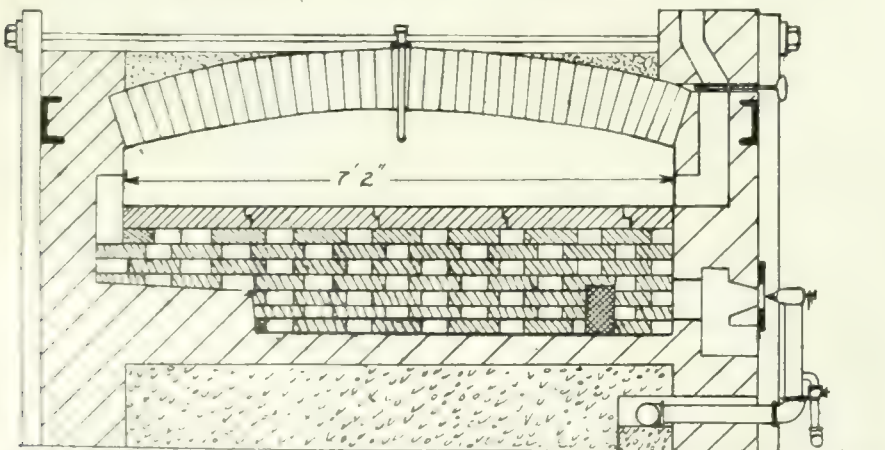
CROSS SECTION OF FURNACE SHOWING ARRANGEMENT OF BURNER PASSAGE AND BAFFLE BLOCK.
